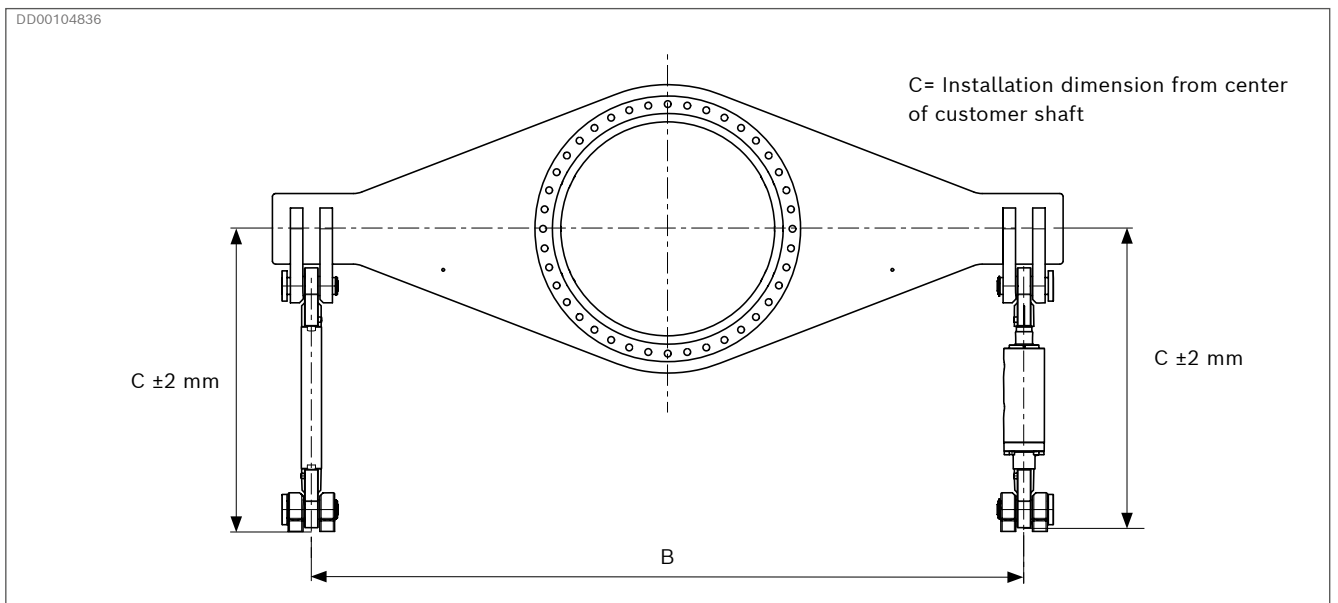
Double ended torque arm DTCA_ and DTCB
